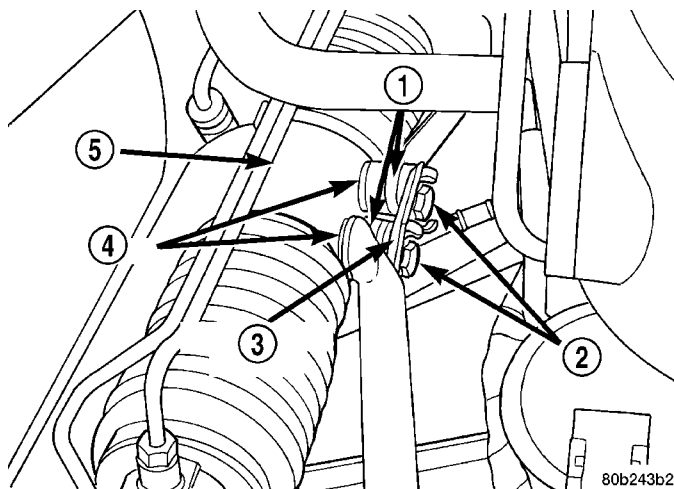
Tie Rod To Steering Gear Attaching Bolts
